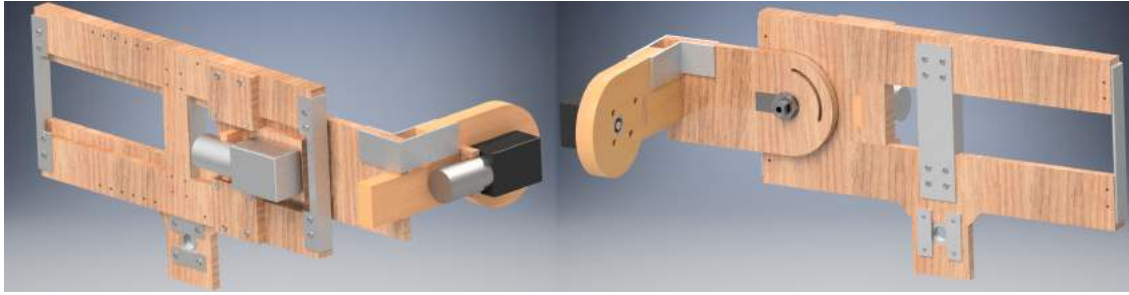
Whole back and shoulder part assembly for only one side (front and back)
